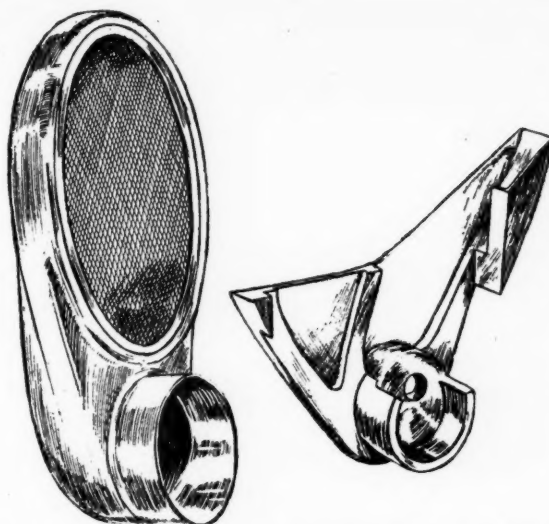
(left)—Crankcase breather. Fig. 18 (right)—Oil scoop which fits to crank arm
